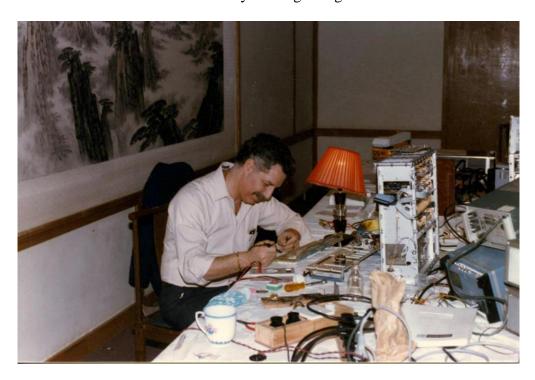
Mr. Bob Glaz is shown while repairing a front panel MFP PCB.
